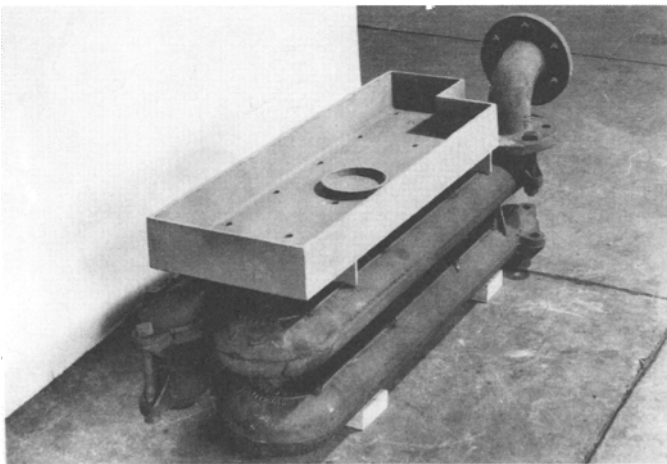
A. Cast iron sections; open coil cooler-coil and distribution pan.
